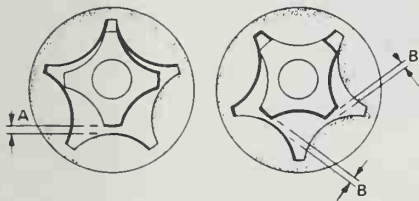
The rotary oil pump wear limits are as follows: A—0.080 inch; B—0.007 inch; End clearance—0.006 inch.
